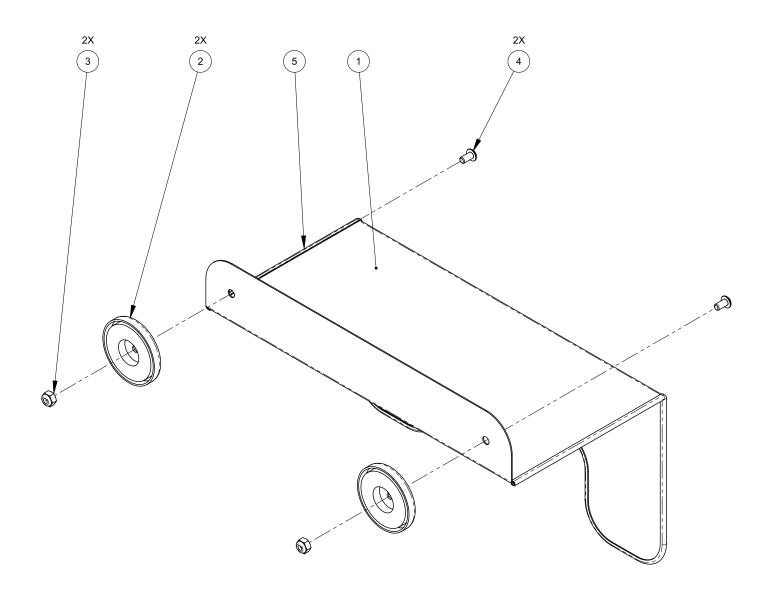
Pump Cover Assembly 000-041-707 Rev. B
